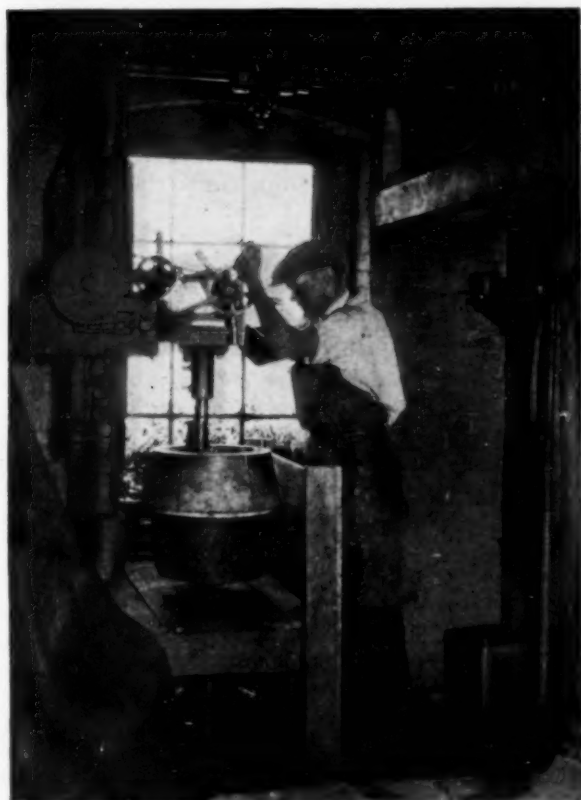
"Jiggerman" Forming Crucible Within a Mold; Note Spindle Supporting Jigger Blade
